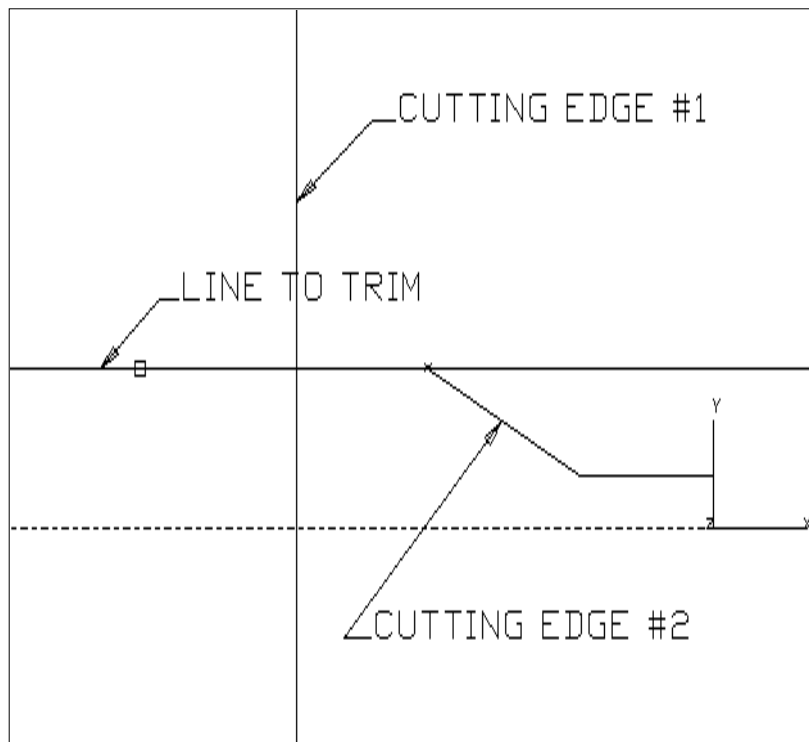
Cutting edges, for trimming the 3 inch diameter
